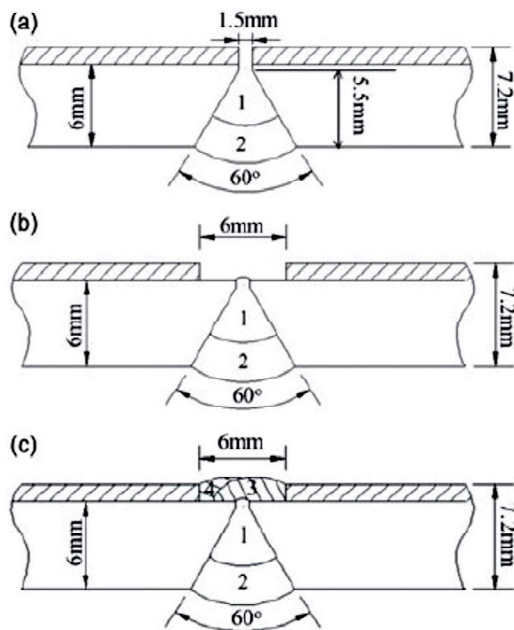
Welding sequences for two butt-positioned plates (Q235 base steel and AISI 304 cladding layer): (a) carbon steel backing welding and carbon steel covering welding; (b) cleaning the stainless steel cladding; (c) stainless steel covering welding. Reproduced from [60] with permission from Taylor & Francis Ltd.
